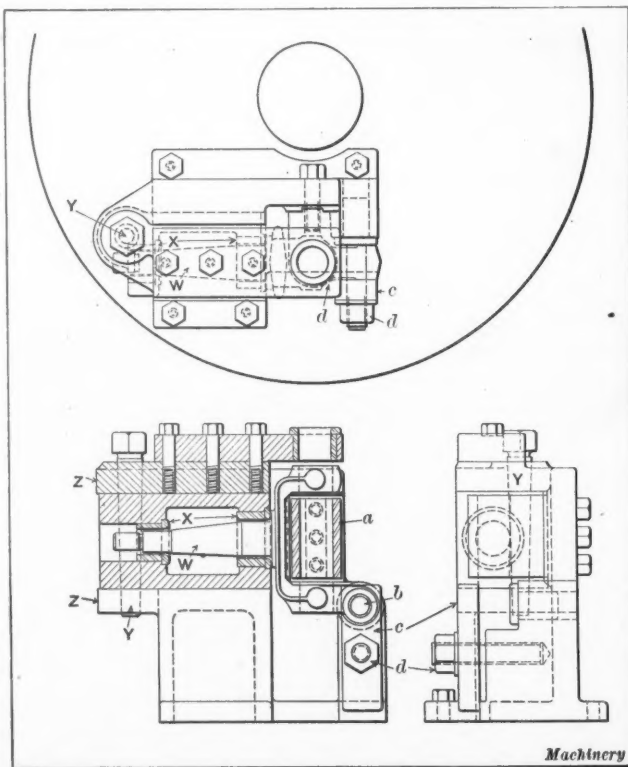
Work-holding Fixture used on Machine shown in Fig. 11 for counterboring and reaming Motor Car Steering Knuckles
